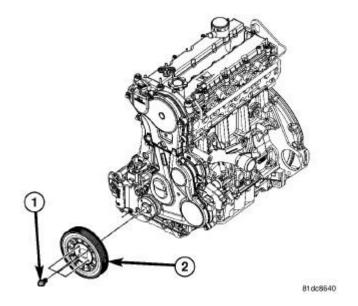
Crankshaft Damper & Bolt Courtesy of CHRYSLER LLC
